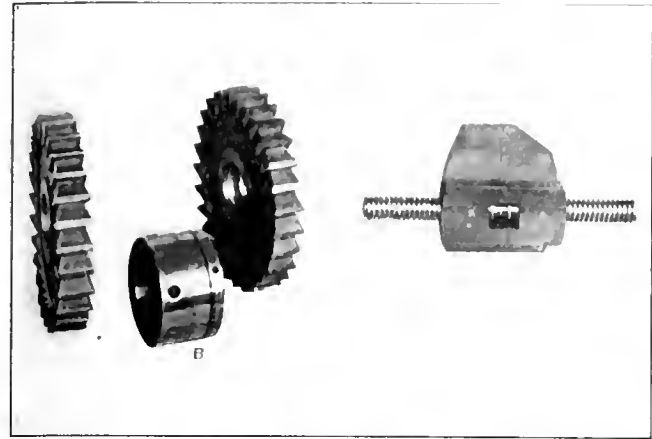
Micrometer Spacing Collar—Jaws ready to be Machined
